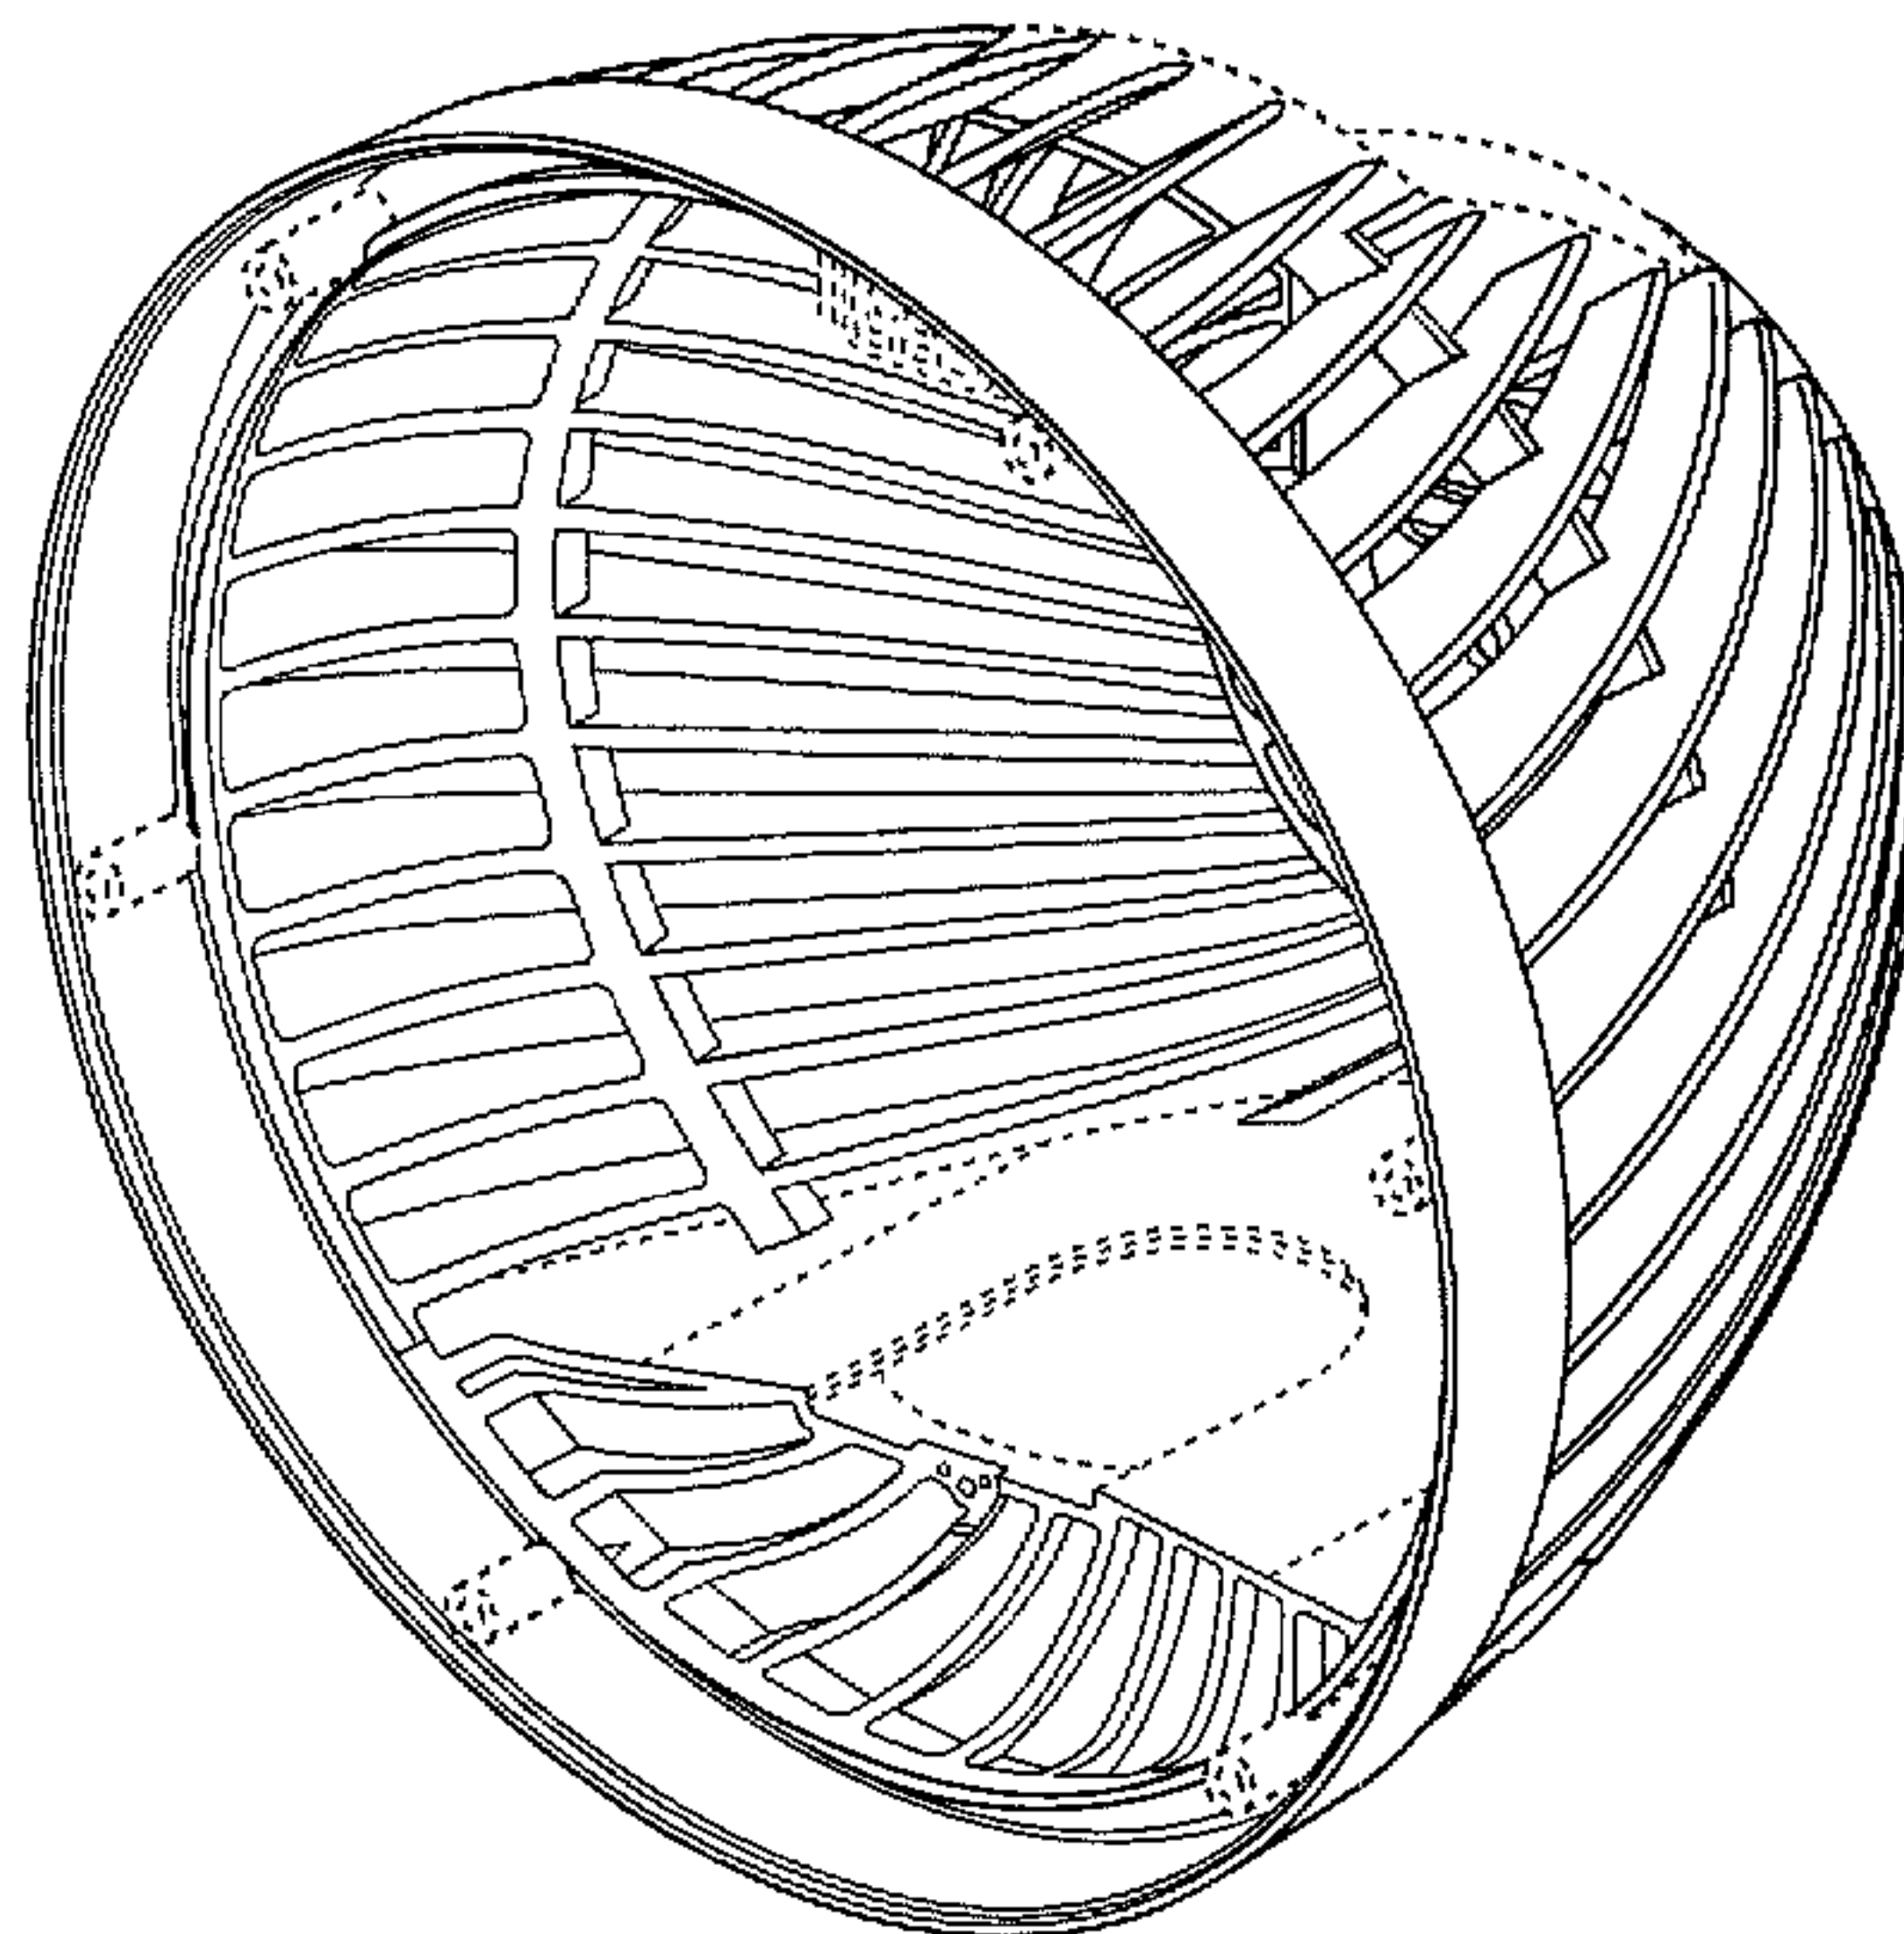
is a right side view of the axial-flow fan intake grill of FIG. 1;
